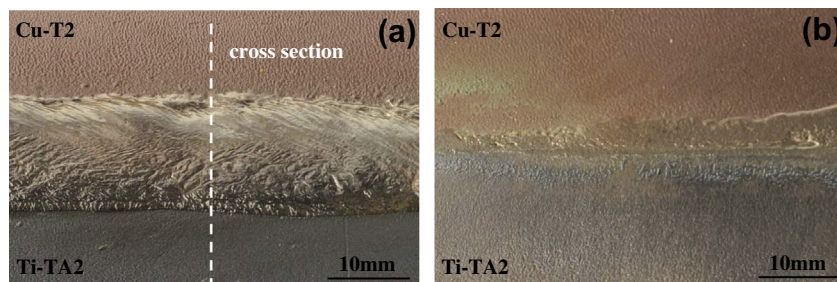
Weld appearance of the Ti/Cu CMT butt joint III (T2–30, TA2–30) at the wire feed speed of 9.5 m/min: (a) front side, and (b) back side.
